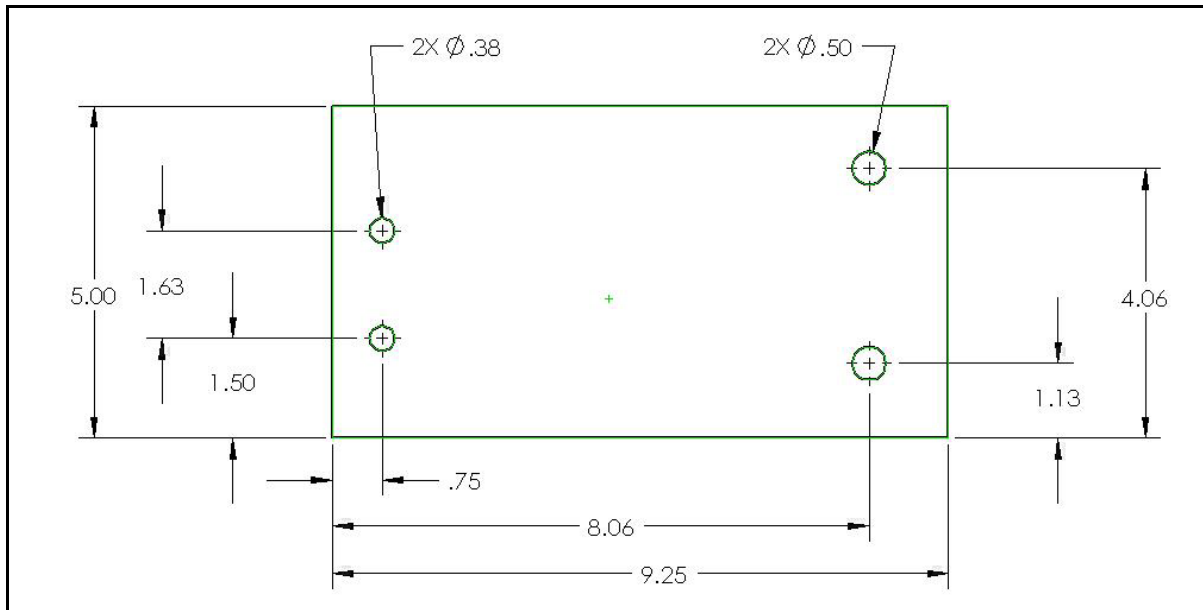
Dimensional Drawing of the Filter Mounting Bracket
